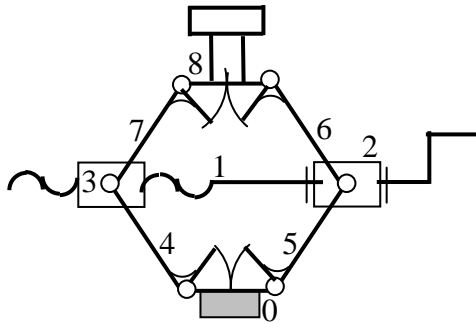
Lifting mechanism with screw hexagonal chain and cylindrical gears
